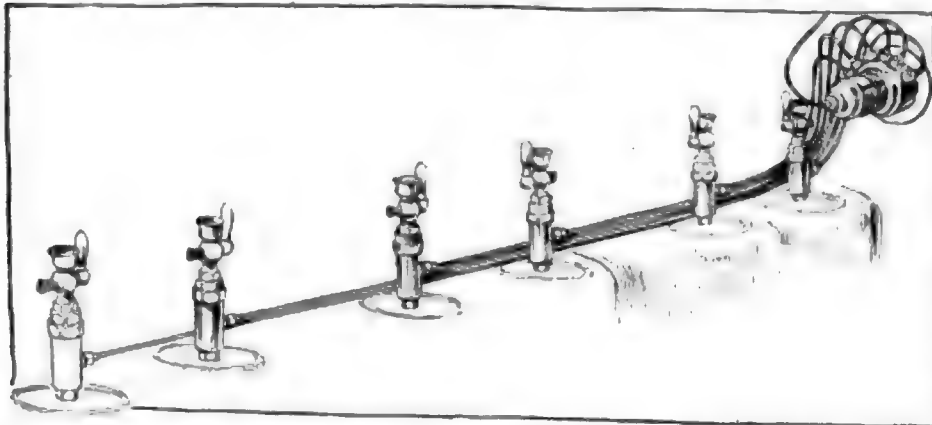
DISCO SELF-STARTER FOR SIX-CYLINDER MOTOR
